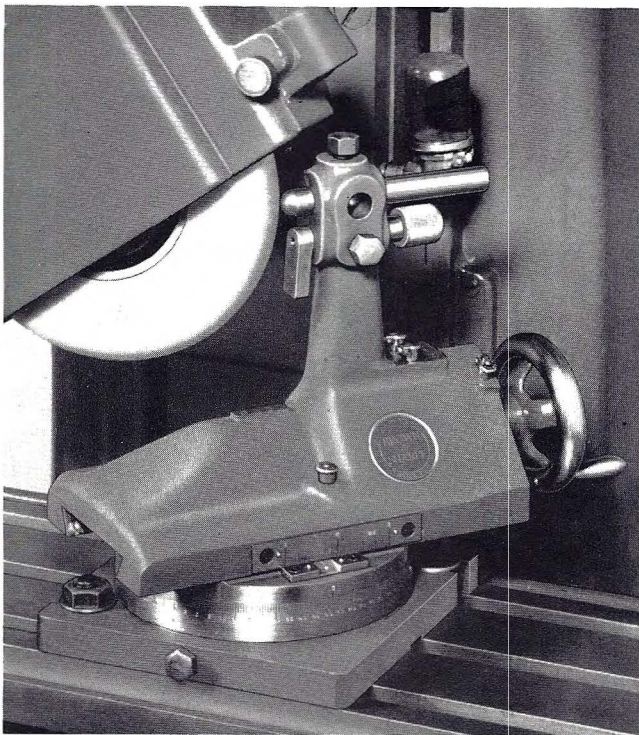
Shaping a radial contour with the Radius and Angle Wheel Truing Attachment. The slide is clamped at the required radius, the diamond tool is set by the gage just below it and the slide is swiveled to form the wheel.
